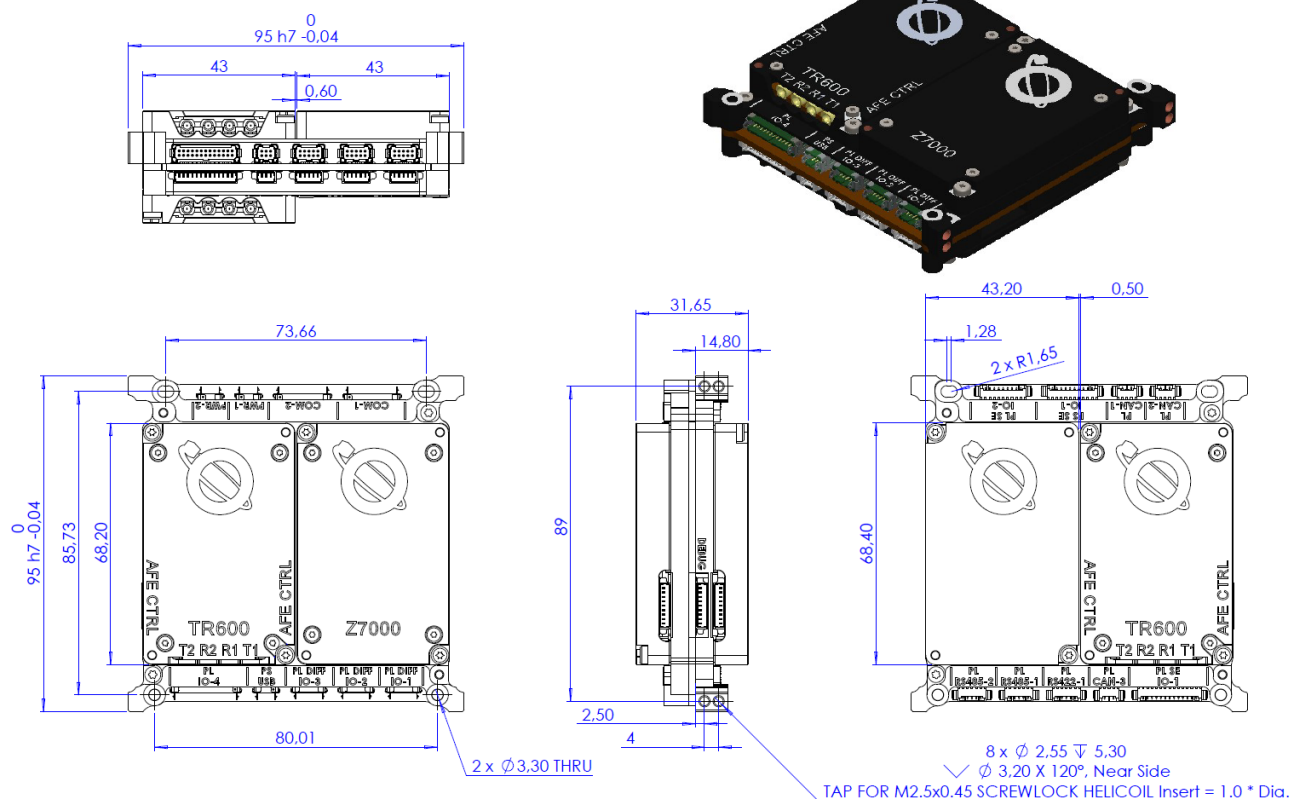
NanoCom SDR MK3 with 2xTR600 mechanical drawing (all dimensions are in mm)
